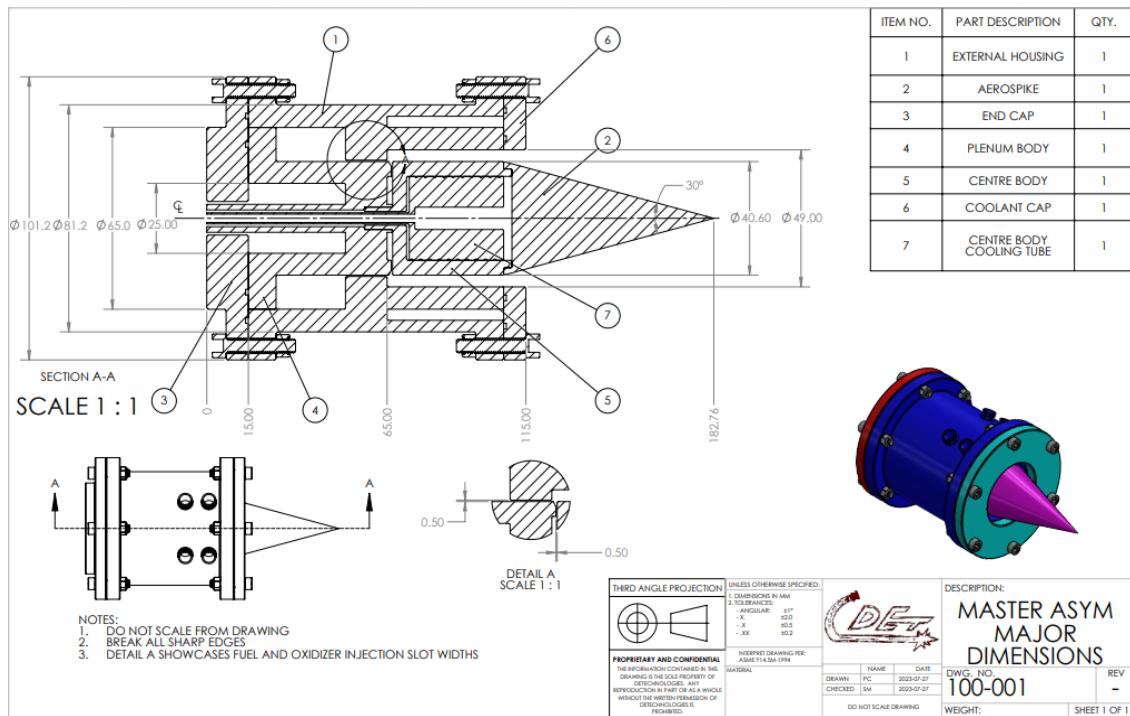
High-level assembly drawing depicting the major components and dimensions of the initial RDE geometry.
